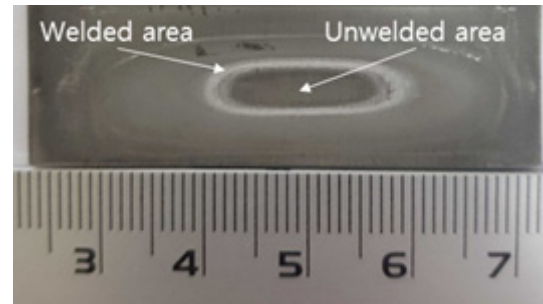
Photograph of joint surface of EMPW weldment
